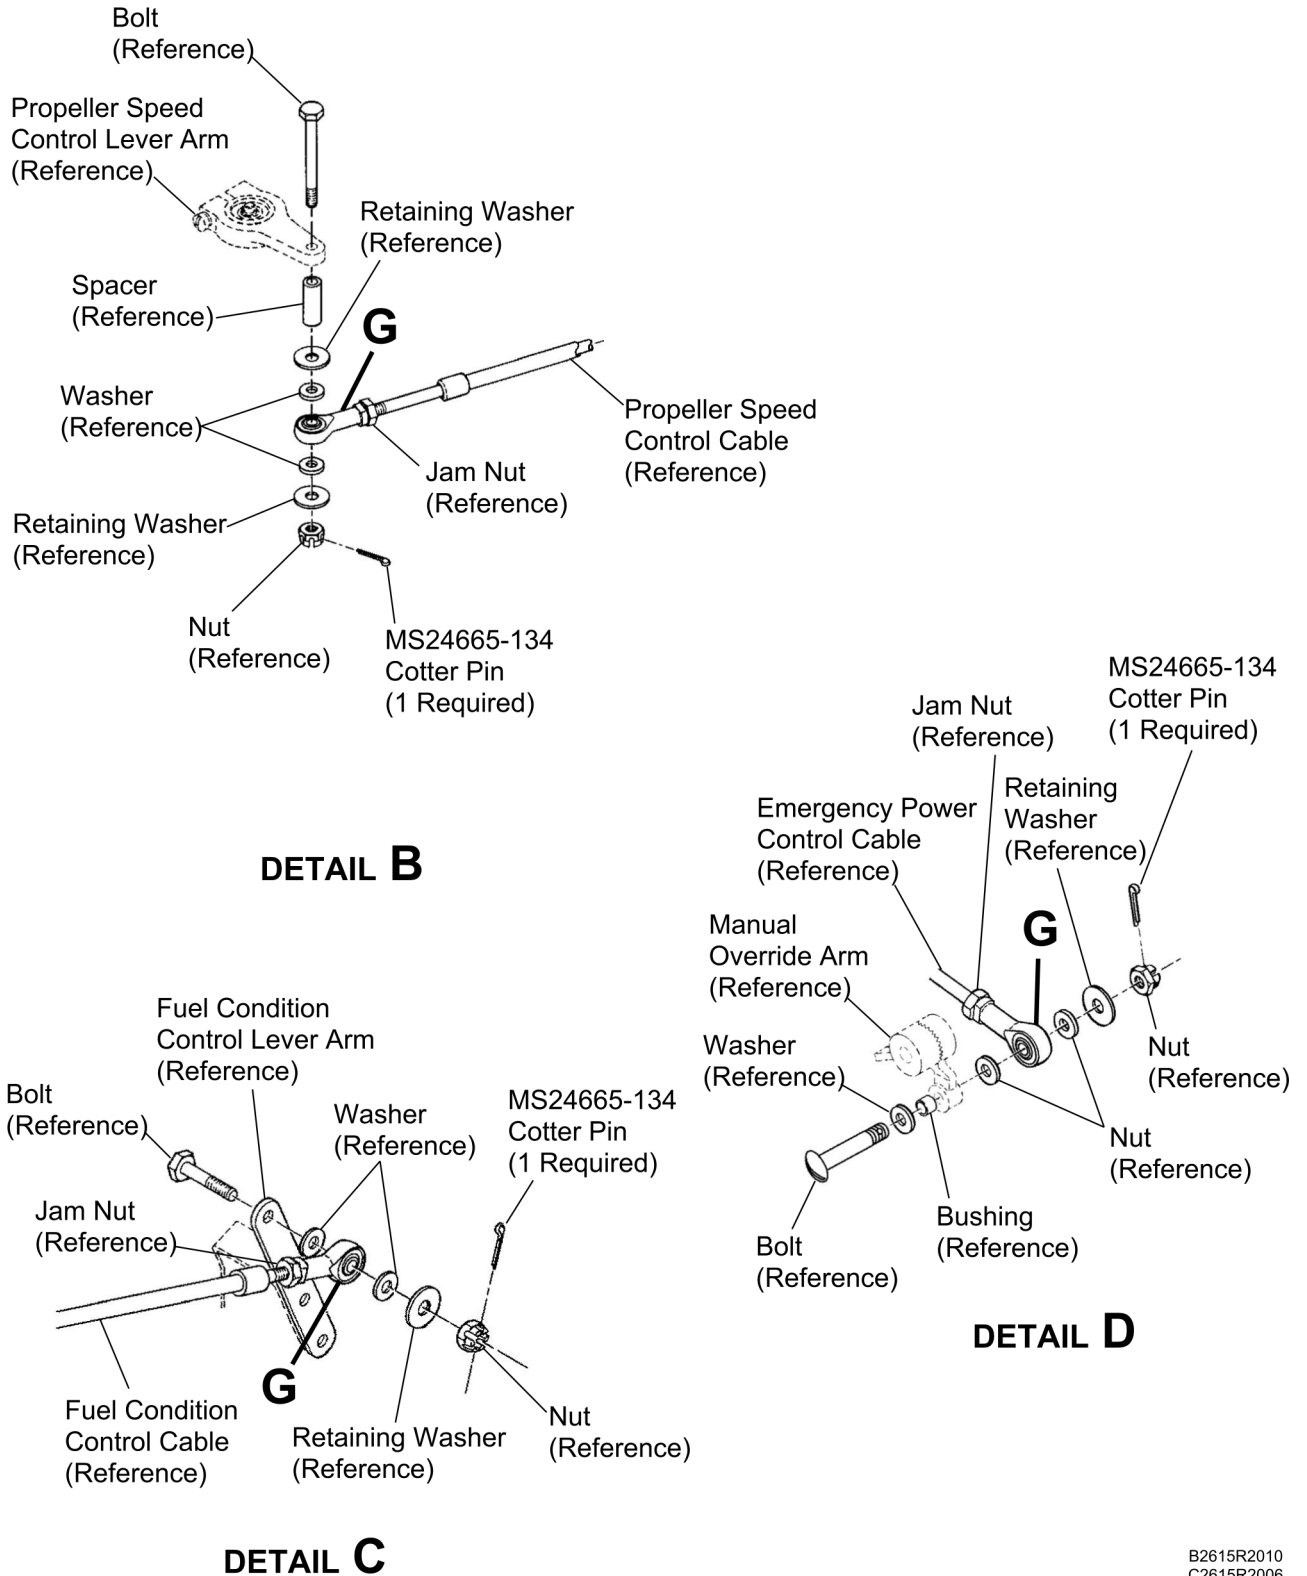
Rod End Bearing Inspection/Replacement (Sheet 2)
